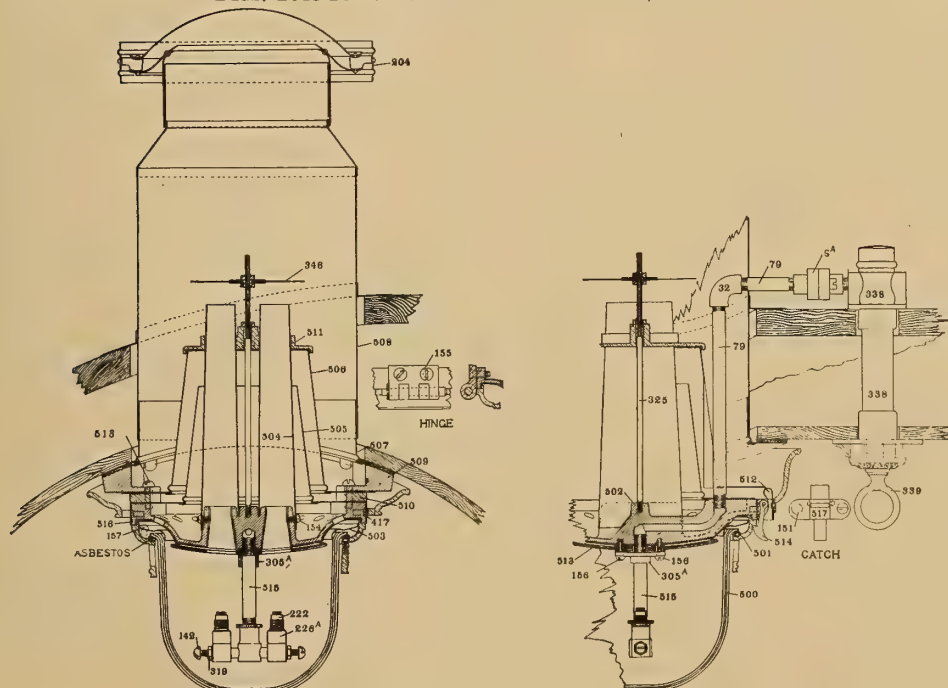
SECTION OF DECK LAMP, NO. 257c.
